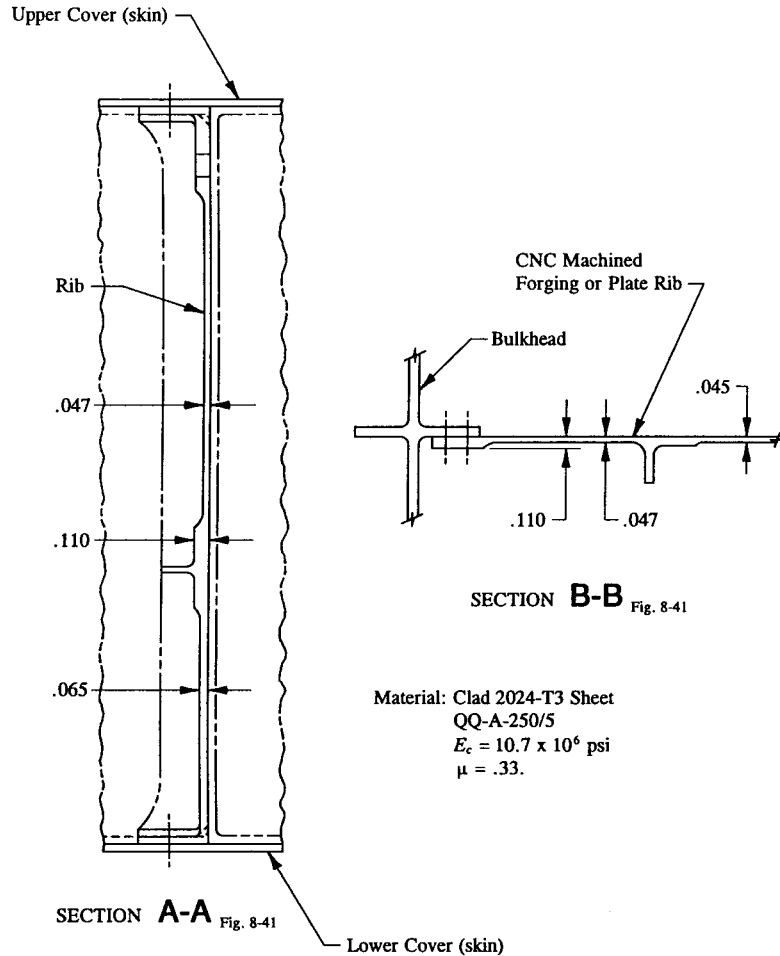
Cross-sectional areas of the CNC machined forged rib.
